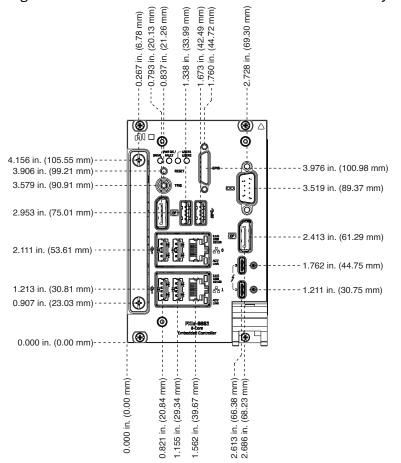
PXIe-8862 with Removable Drive Front Panel Layout and Dimensions
